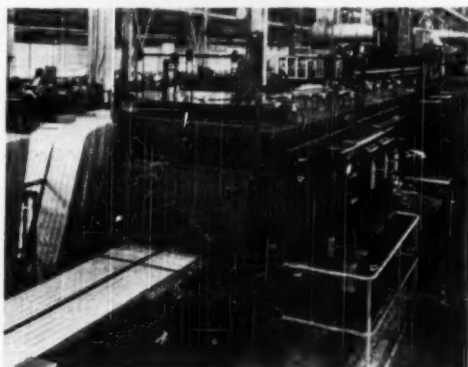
ALUMINUM EVAPORATOR PLATES ENTER CHARGING END OF MESH-BELT-CONVEYER TYPE BRAZING FURNACE
